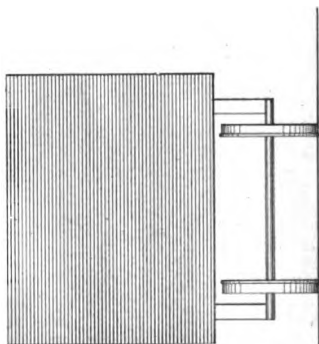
Present enlarged Carriage 7'-0" Gauge.
